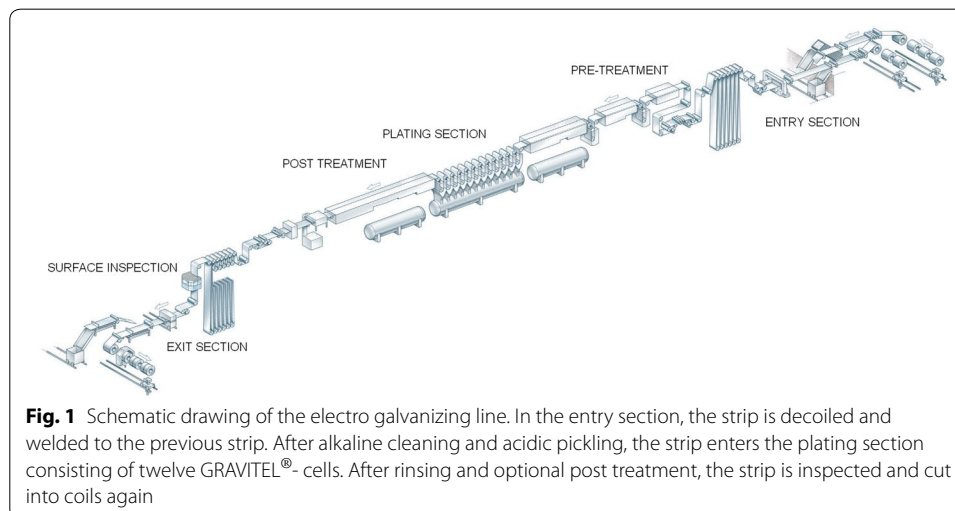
Schematic drawing of the electro galvanizing line. In the entry section, the strip is decoiled and welded to the previous strip. After alkaline cleaning and acidic pickling, the strip enters the plating section consisting of twelve GRAVITEL[®]- cells. After rinsing and optional post treatment, the strip is inspected and cut into coils again
